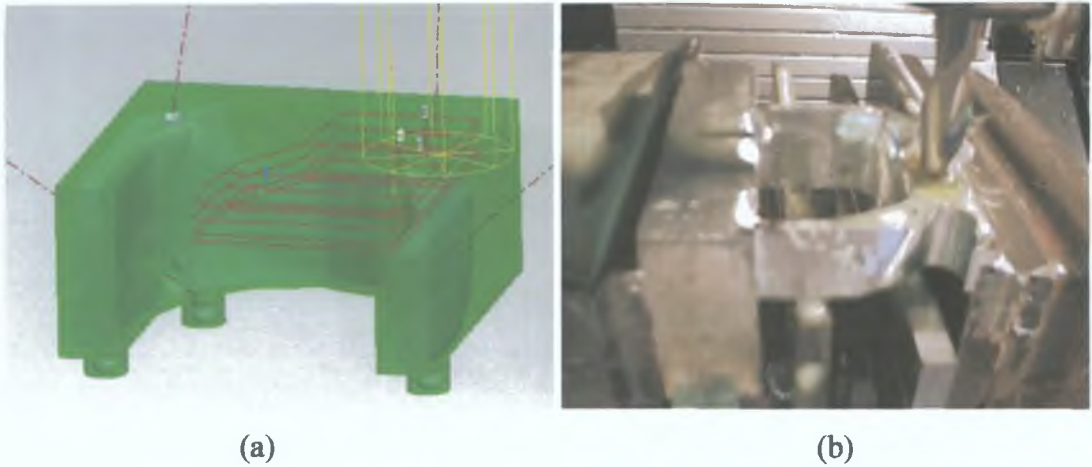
Volume Mill Sequence 3 (a) ProEngineer Tool Path. (b) Machined Work Piece.
